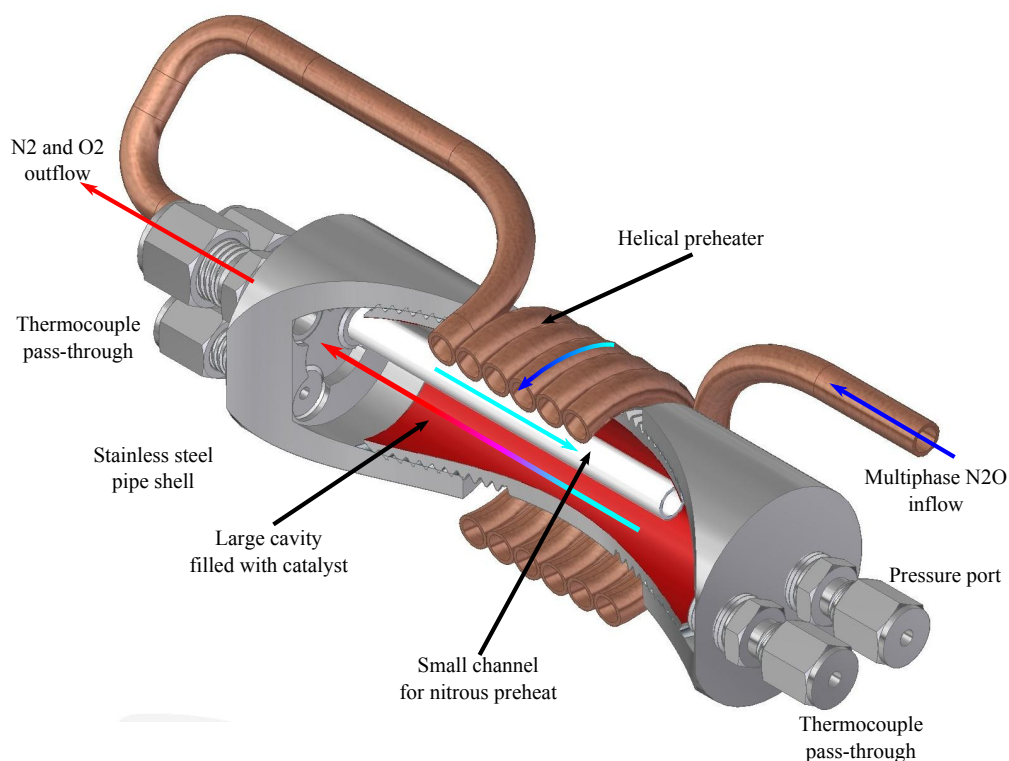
Design of the 1-inch igniter prototype, showing the modified shell and tube heat exchanger.
